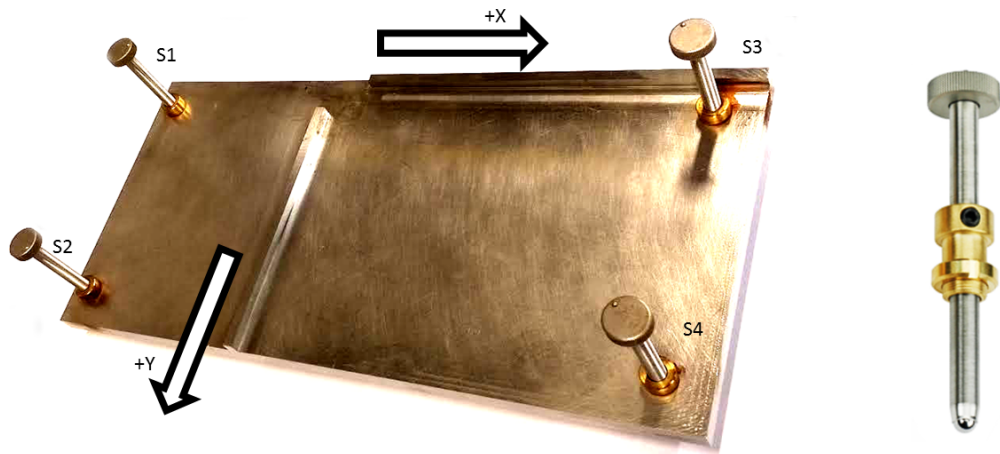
Photo of plate used for test pieces alignment, and adjustment screw example.
